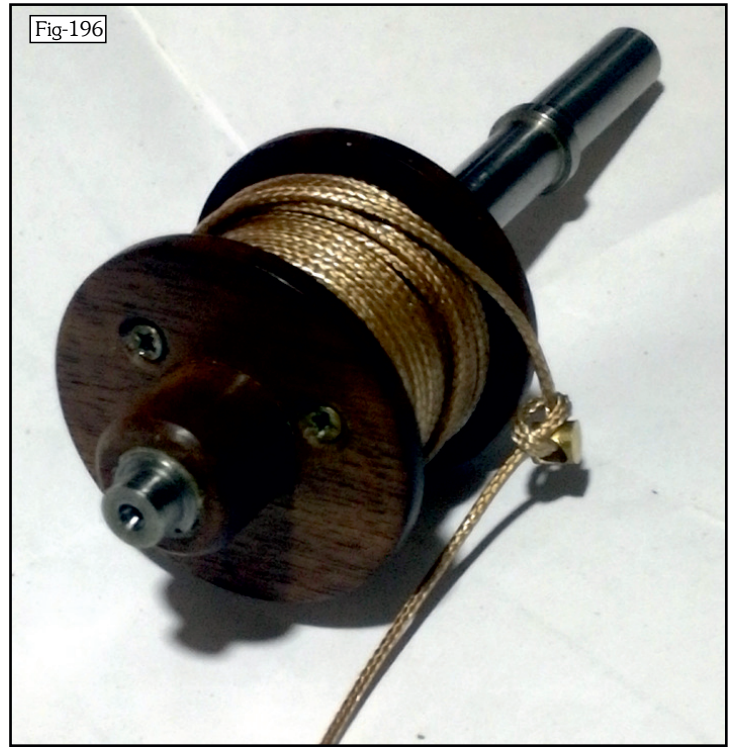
shows the part assembled Drum with Cord & Cord-End and in Fig-196 you can see the fully assembled Drum with the Cord wound on. The second Cord-End is threaded on but just held on the Cord with a simple knot. It can't be finished off until I've made the Eyelet that will be the top of the Drive Weight. I will have to 'un-wind' the Cord because the grub screw that holds it to the spindle is under it and I have to take it off the spindle to glue the Ratchet to the Drum and fit the Main Drive Gear.
